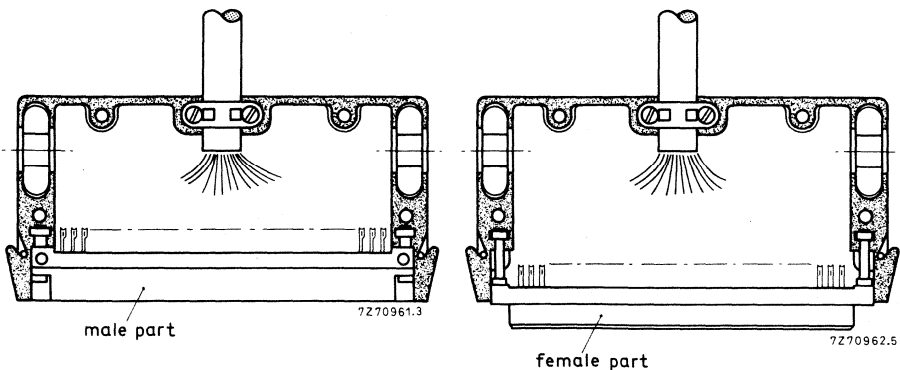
Fixing of cable to the hood and mounting of the hood to the connector part. Maximum permissible cable diameter is 11 mm (e.g. 96 insulated wires AWG30).
